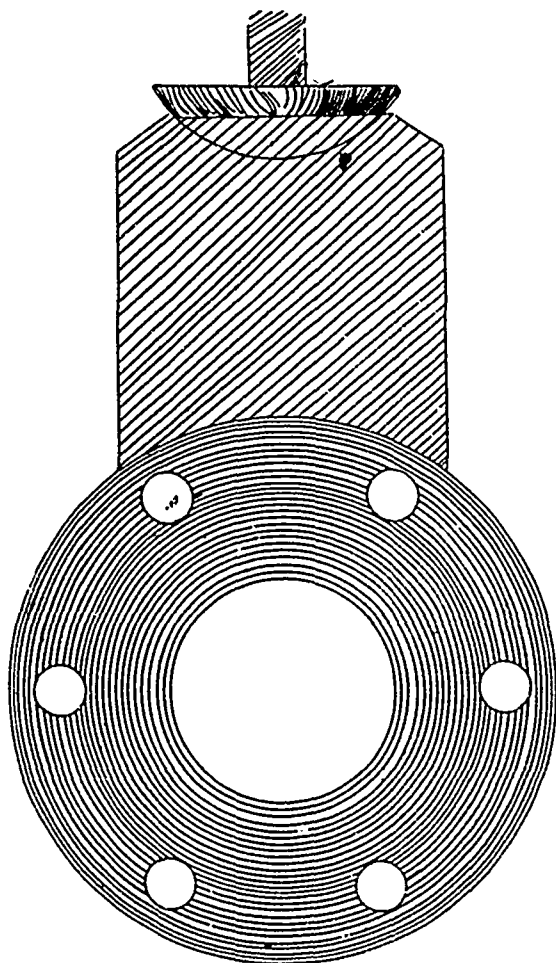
SHOWING COVER THAT BALANCES THE VALVE.
